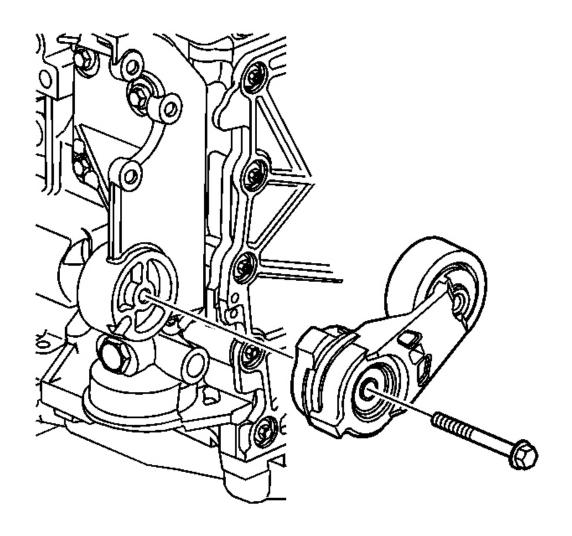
View Of Drive Belt Tensioner Courtesy of GENERAL MOTORS CORP.
